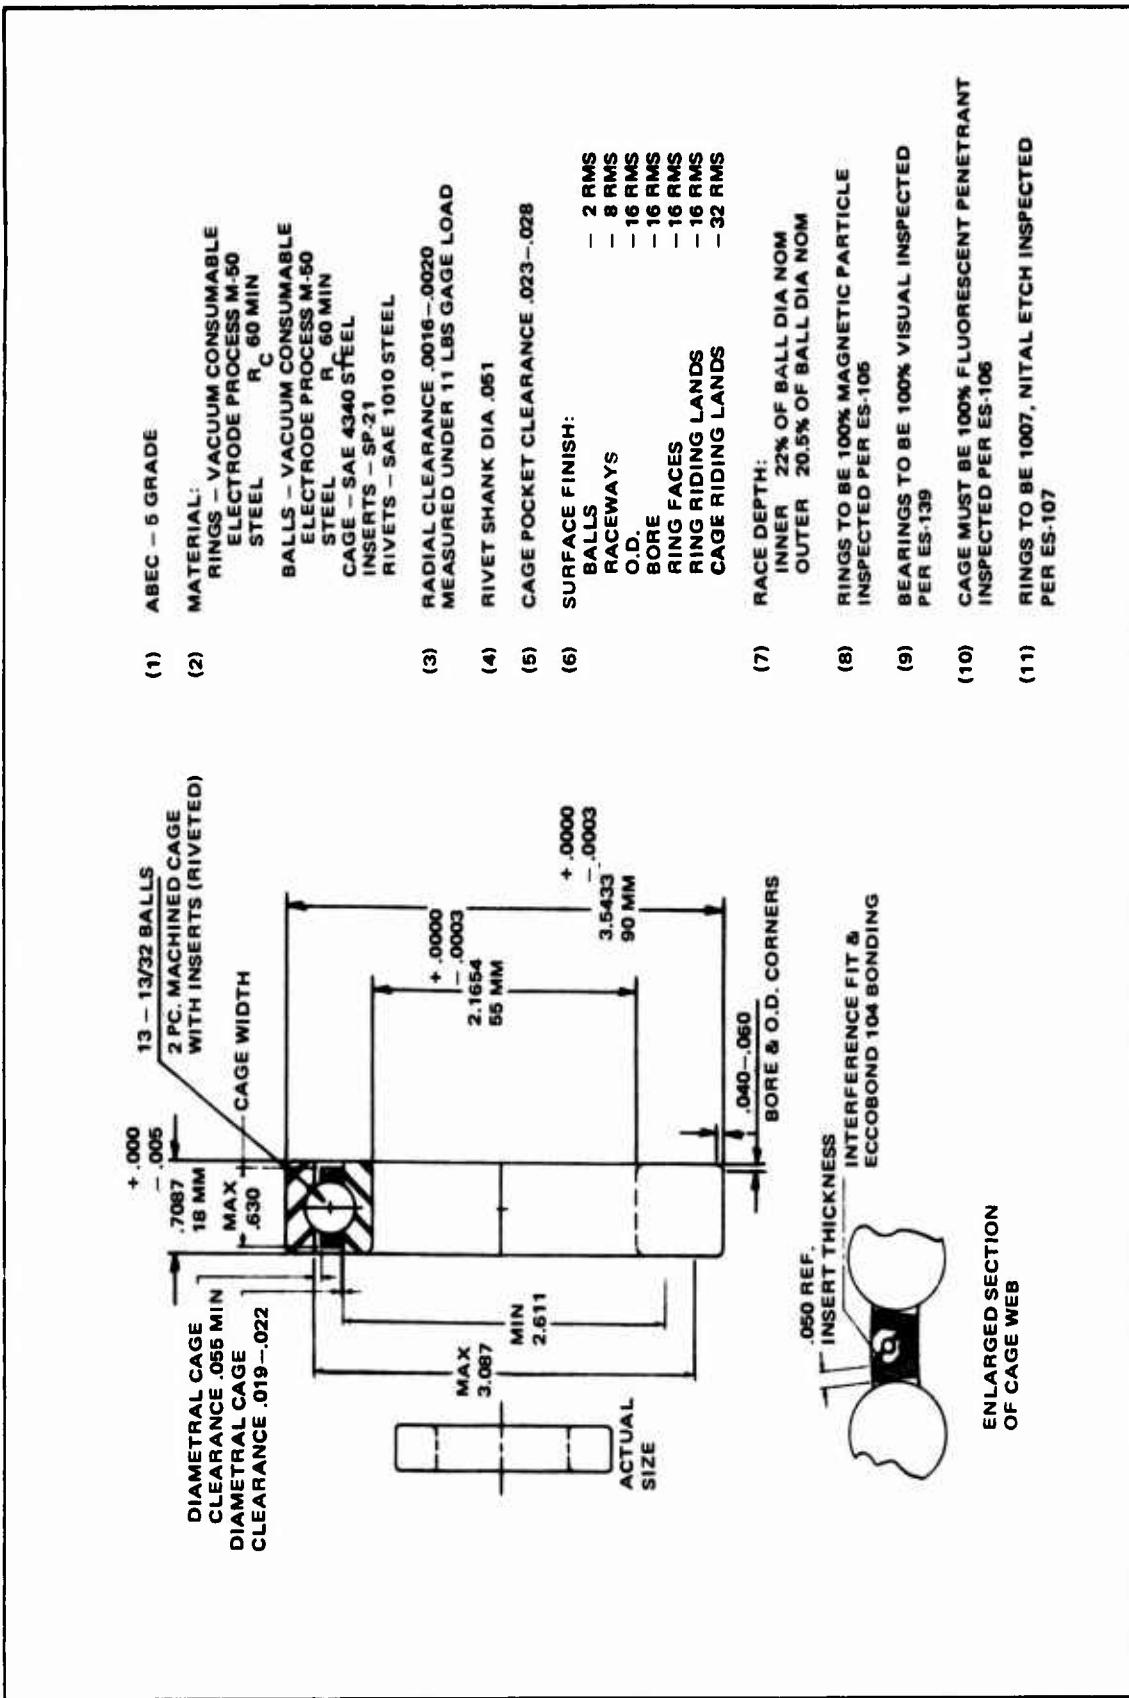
Fail-Safe Machined Cage With SP-21 Inserts.
